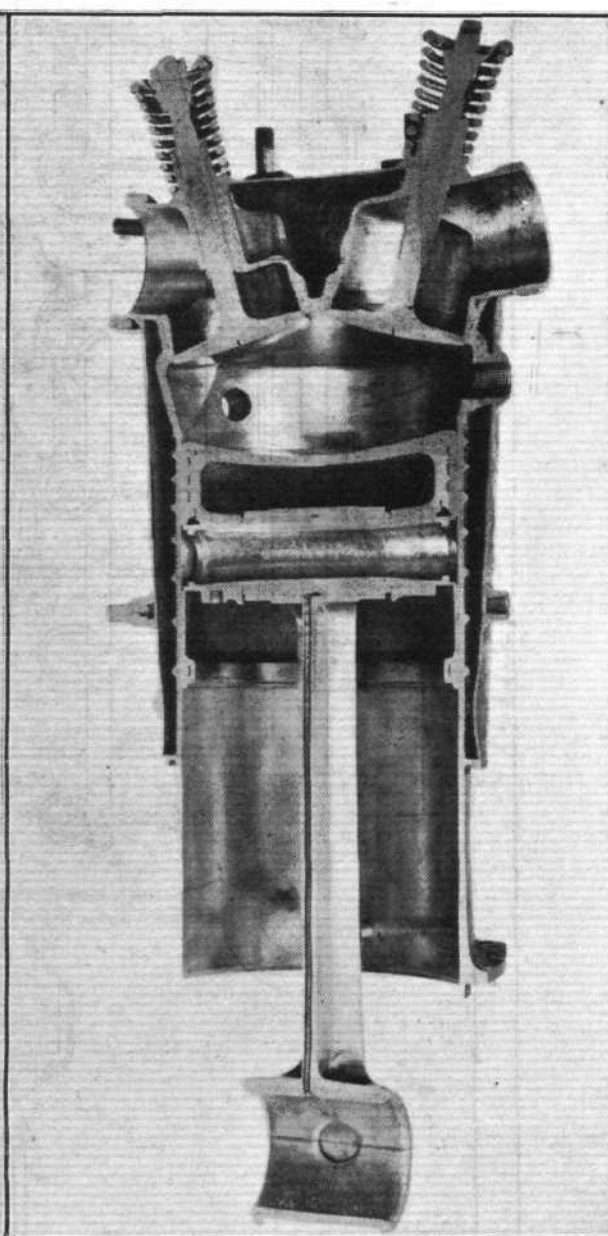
Sectional view of cylinder, piston, gudgeon pin, connecting rod and valves, showing water jacket spaces and method of cooling the exhaust valve stems. Note the sectional view of the connecting rod is shown at right angles to its correct position in the cylinder.
